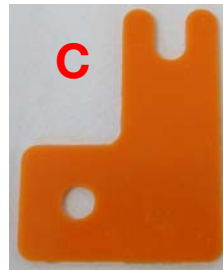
5. Part No. 29-1300 0.030" thick Shim for front or back mount Dial Wheel Installation
